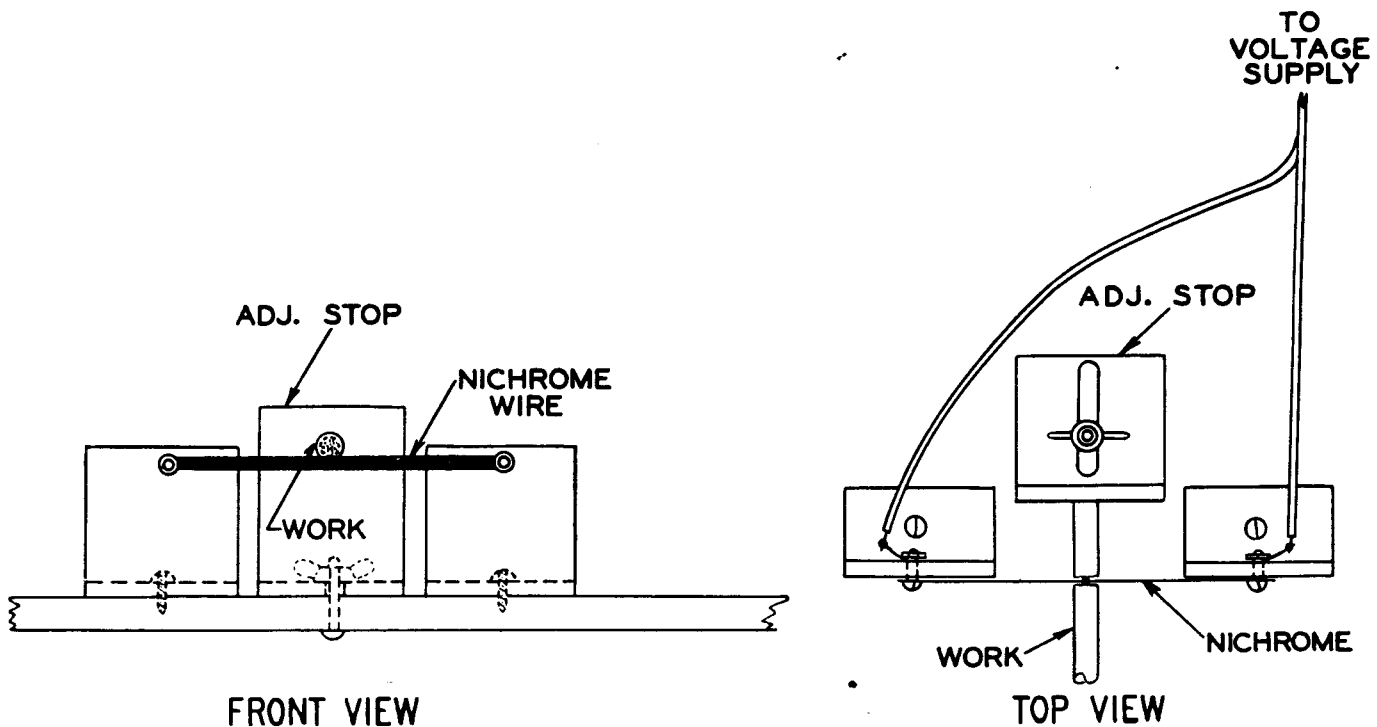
DETAILS FOR MAKING INSULATION BURNER
